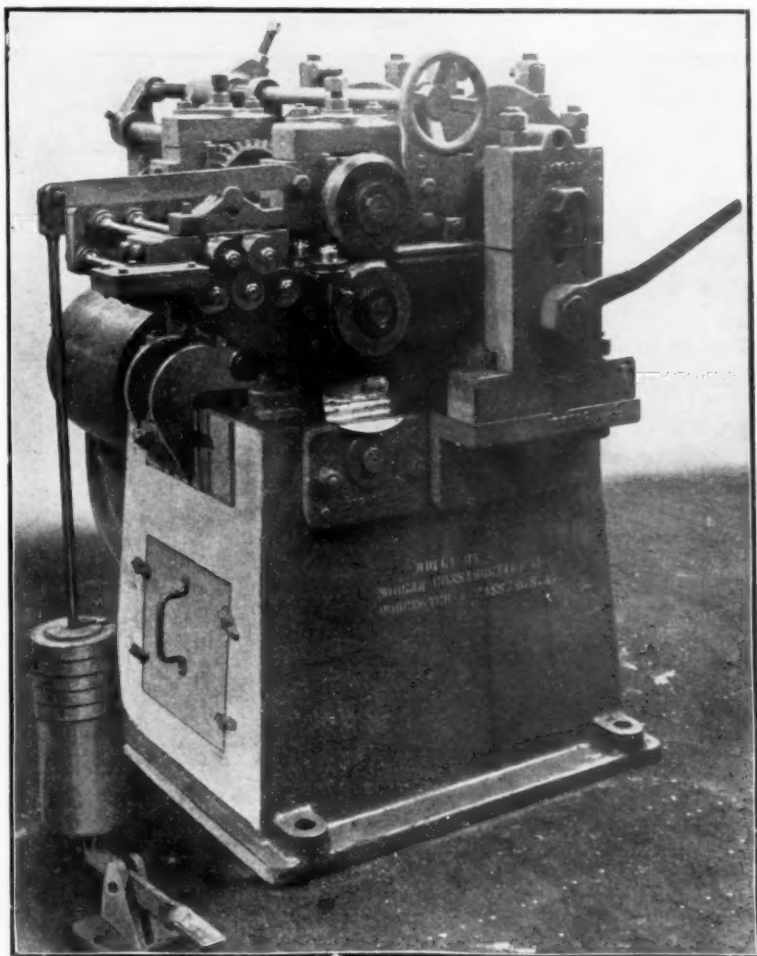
FRONT VIEW OF DIFFERENTIAL ROTARY FLYING SHEAR FOR EITHER HOT OR COLD HIGH SPEED CUTTING.
